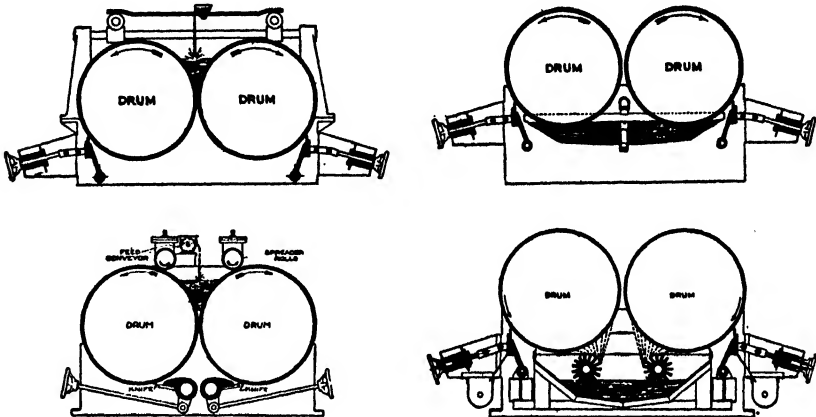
Types of Feed Used for Drum Dryers. (Courtesy Buffalo Foundry and Machine Co.)
